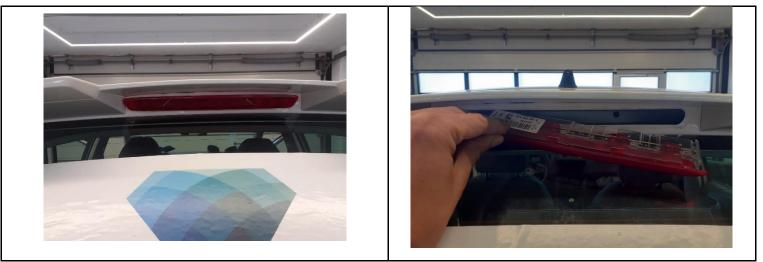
Additional brake lighting level 1 disassembly process – SEAT Ibiza model IV
